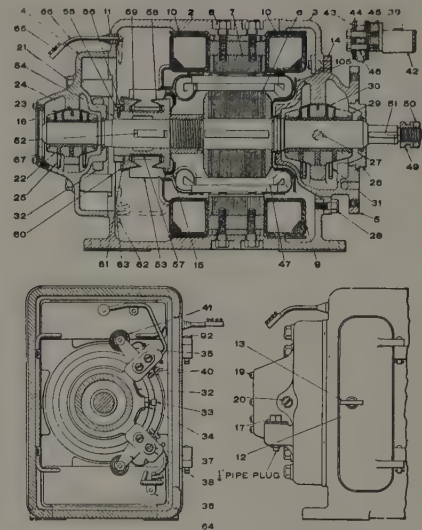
Motor Portion of Motor Driven Air Compressor for Electric Cars.
